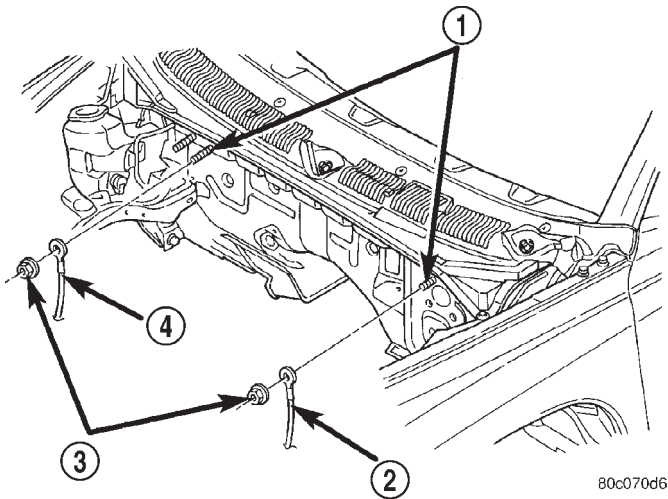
Engine-To-Body Ground Strap Remove/Install - Typical
